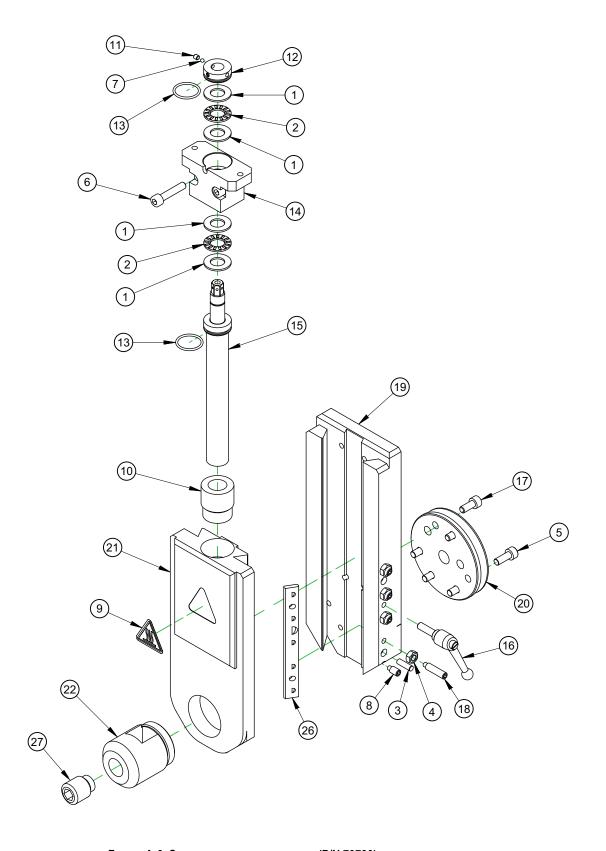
SLIDE TOOL HOLDER ASSEMBLY (P/N 79790)
